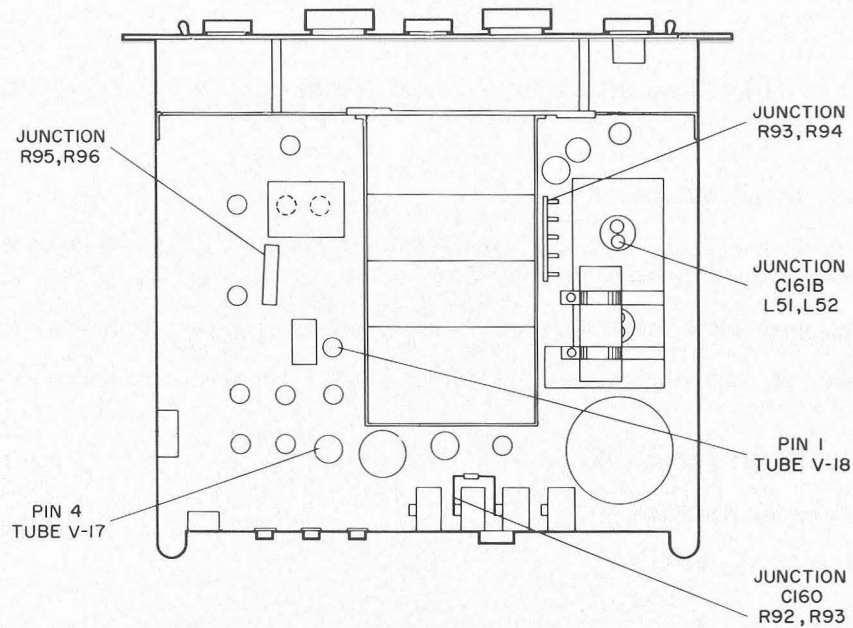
Radio Receivers SP-600-JX-21 and SP-600-JX-17, Bottom View
